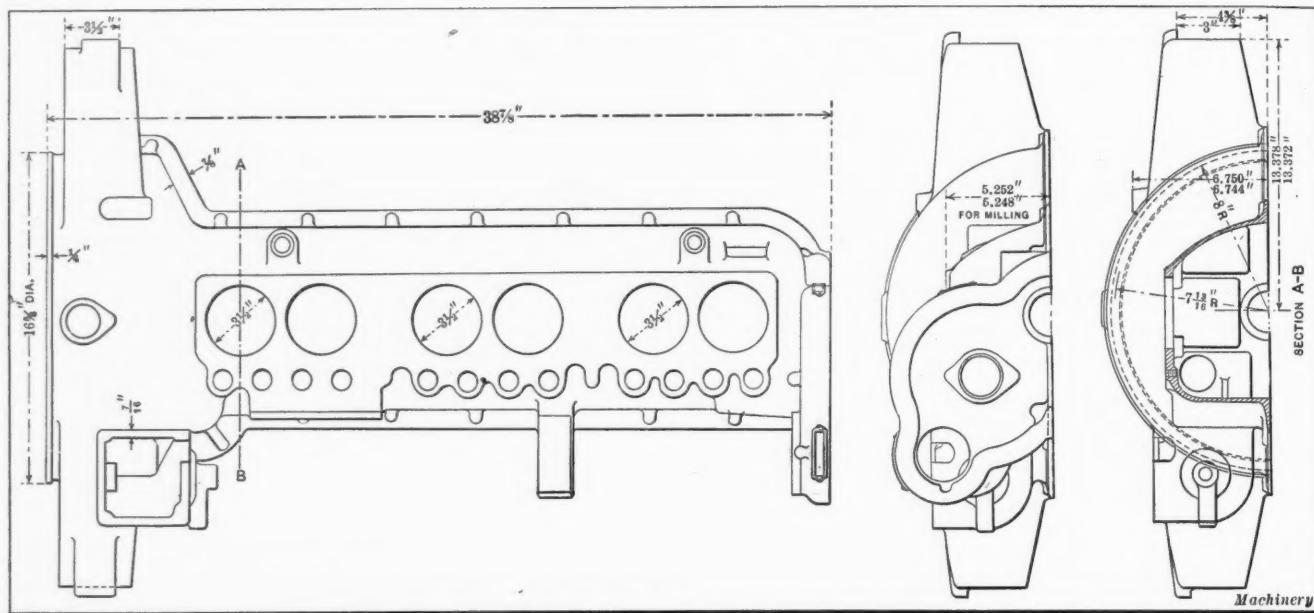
Design of Upper Half of Crank-case for Buick Motor Car
